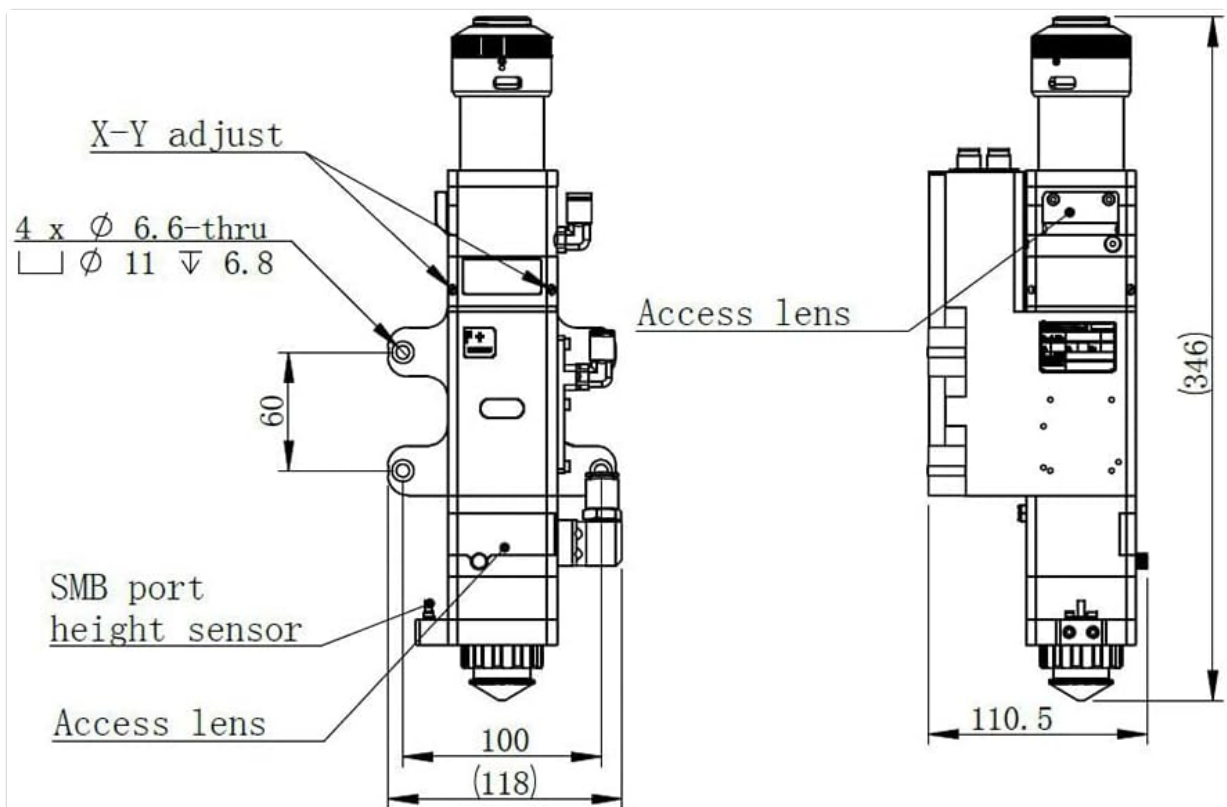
Technical drawing showing dimensions and key features such as X-Y adjustment points, SMB port for height sensing, and access points for lenses.
